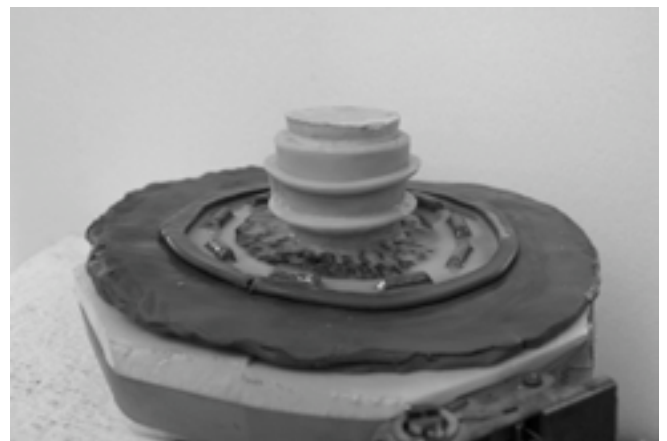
Because the plug is collapsible once the plaster support is removed, it is easily pulled out of the surrounding mold piece.
